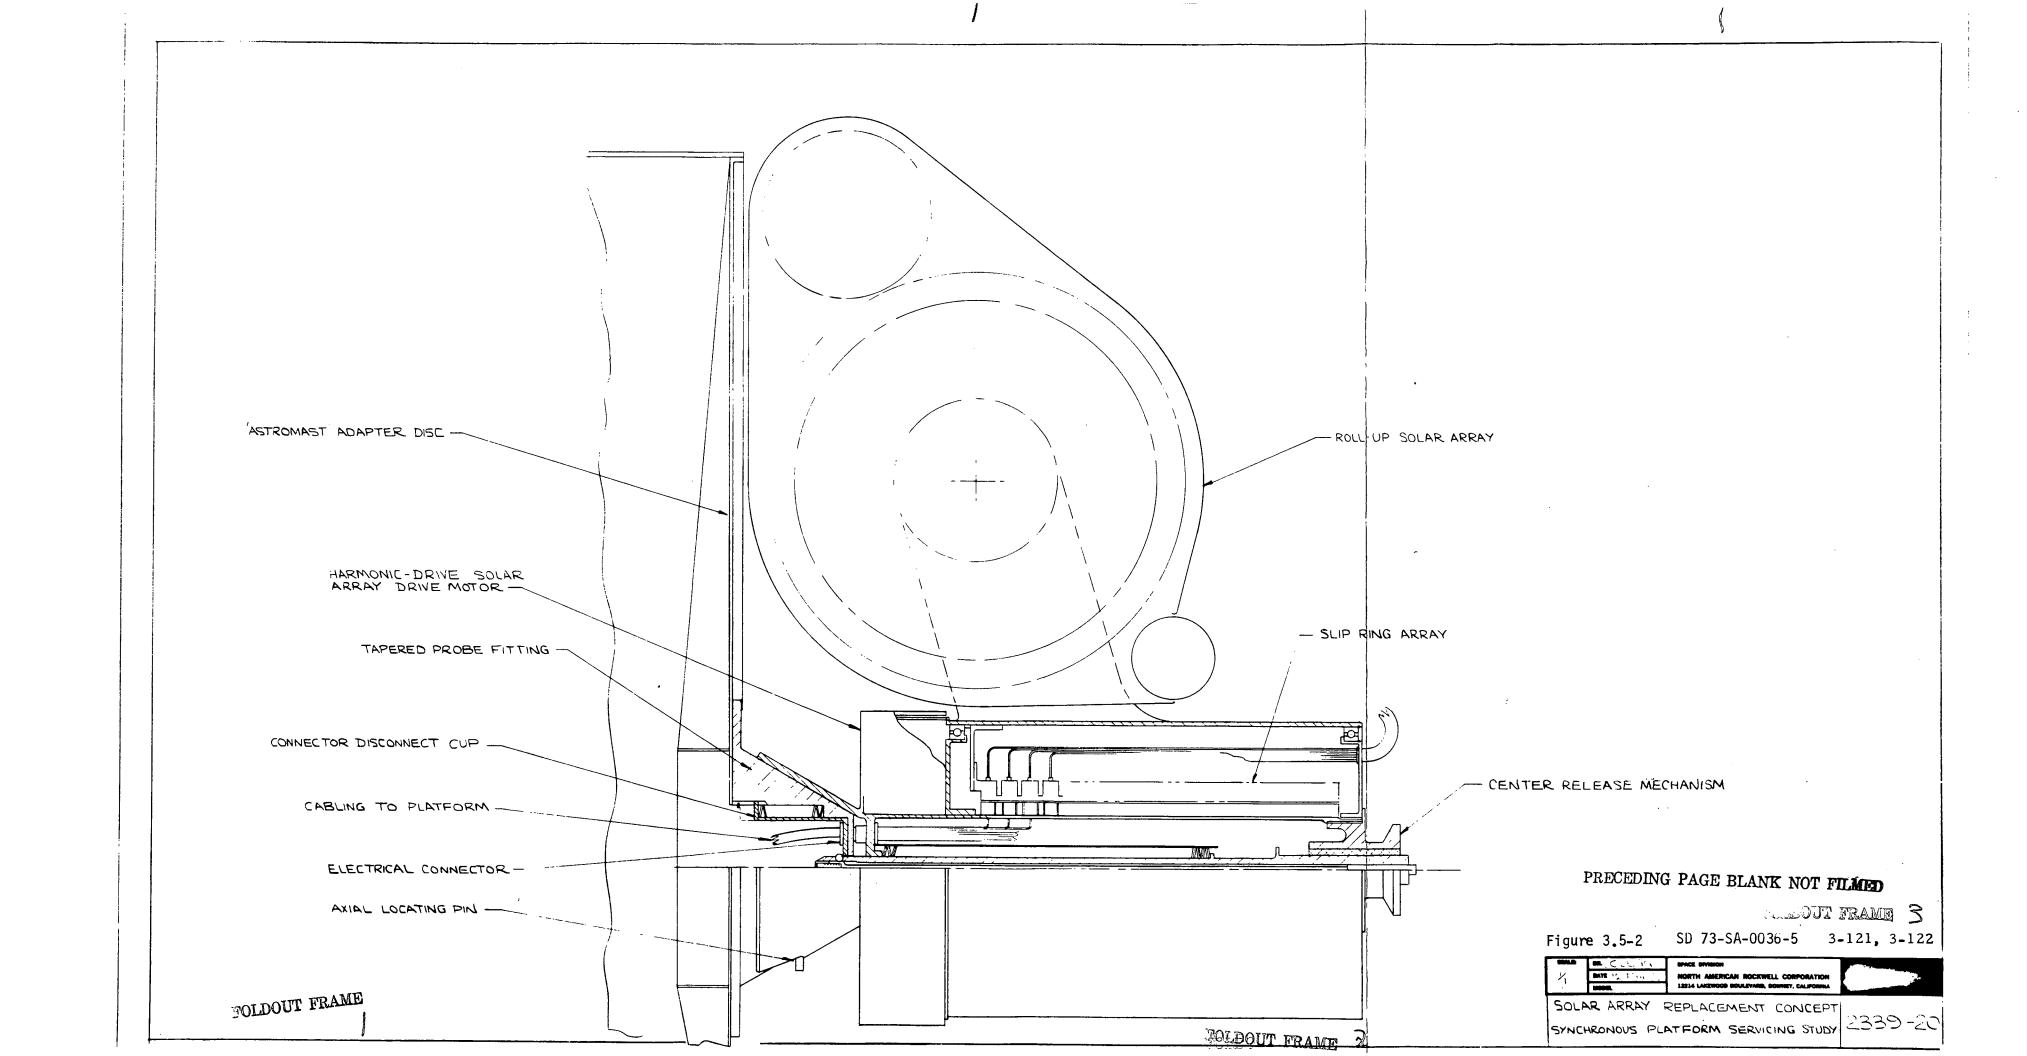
shows how the module release mechanism can be applied to attach a replaceable solar array using the manipulator and its terminal device. The assembly consists of the roll-up solar array, the array drive motor, and slip ring assembly which transfers power across the rotating joint. The mechanism features a conical probe and cup with axial location provided by a locating pin riding in a tapered slot. The mechanism differs from the module mechanism by the requirement to carry power across the joint. This is accomplished by a number of connectors placed around the central rod. In order to eliminate pin damage in the connectors due to misalignment, the design features connector mating only after correct alignment of the array assembly to the probe fitting. This is accomplished by addition of a "connector disconnect cup" to which one-half of the electrical connectors is attached. The cup is spring loaded with sufficient load to overcome connector mating forces. After correct alignment of the array, the preload rod is depressed until the ball lock is behind the connector cup. Release of the lock rod (to extend the balls) and release of the preload rod results in connector mating. Conversely, depression of the lock rod results in demating of electrical connectors before array removal.
